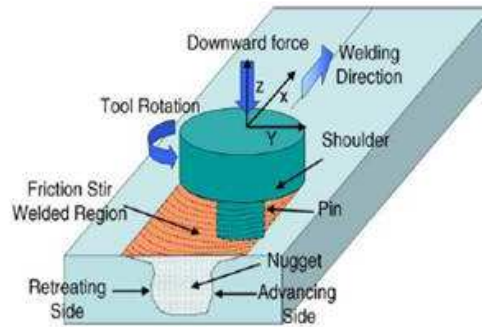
Different Phases in Friction Stir Welding Process [4]
